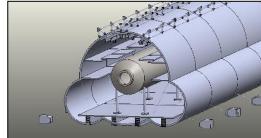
Inflated assembly tent, cutaway, for winding habitat modules, note balconies, overhead crane
